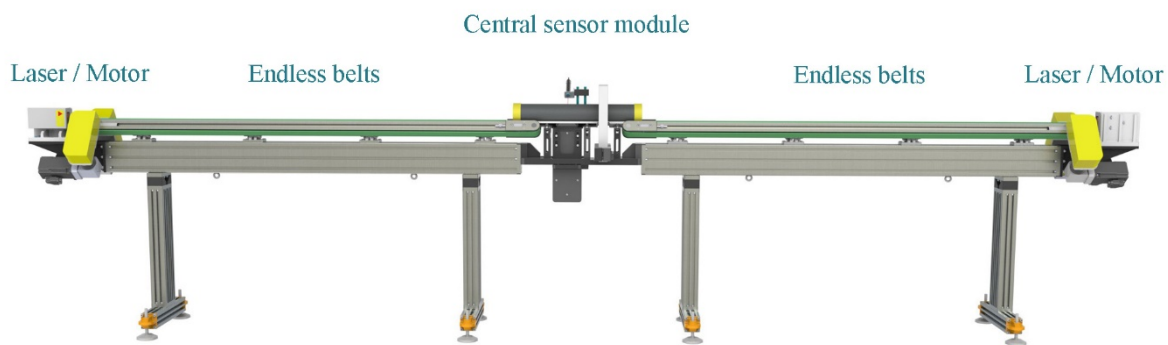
CAD drawing of the Multi-Sensor Core Logging System (MSCLS) consisting of two-sided (endless) conveyor belts, the central sensor module, the drive motors and the laser distance sensors.
